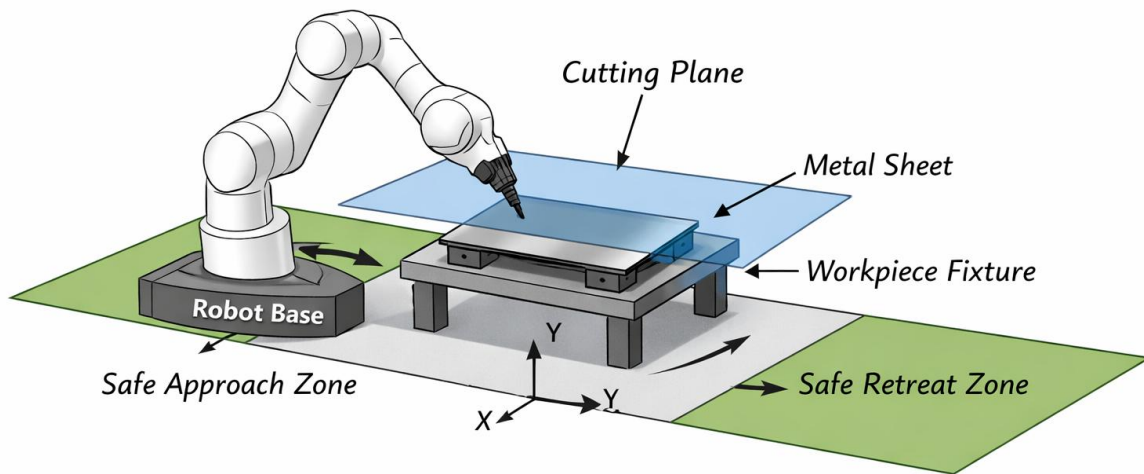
Schematic showing the robot base frame, defined cutting plane, workpiece fixture, and safe approach and retreat regions.
